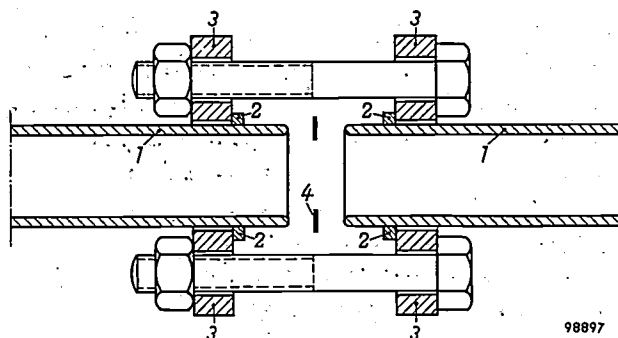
Vacuum-tight joint directly between small tubes. The tubes 1 to be connected have their edges rounded off; 2 flanges welded on to tubes; 3 loose rings holed to take tiebolts; 4 copper packing ring.
